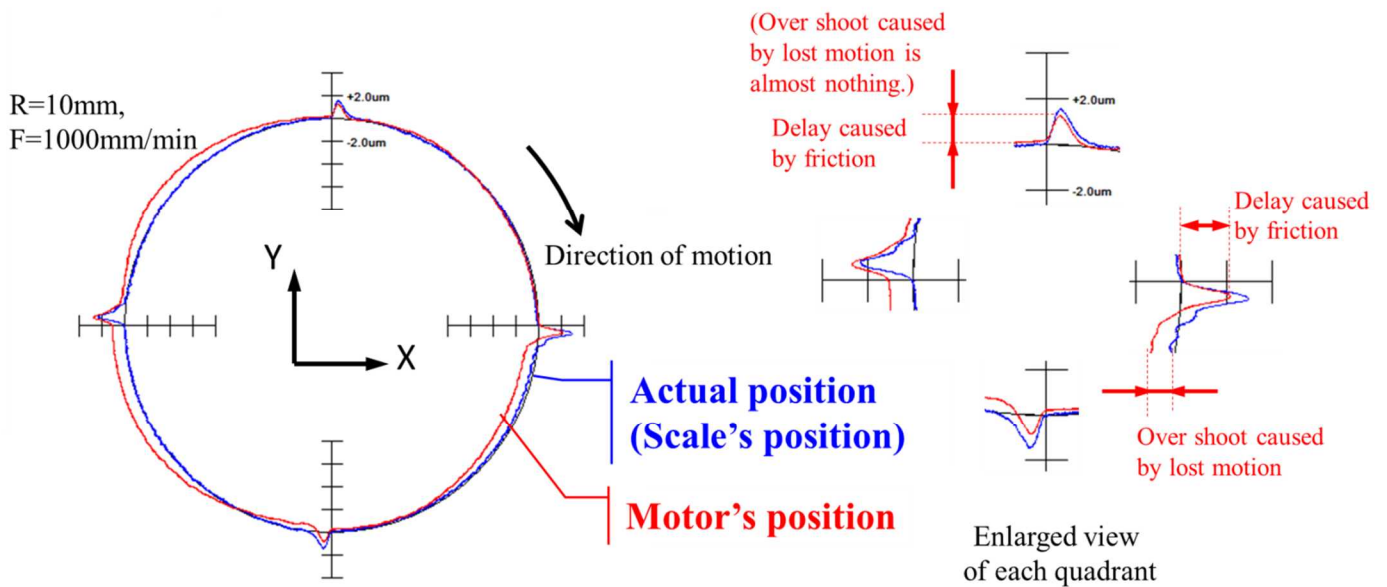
Measured chart of circularity of actual position and motor position during full-closed loop in case of machine tool with feed-axis of rolling guide
